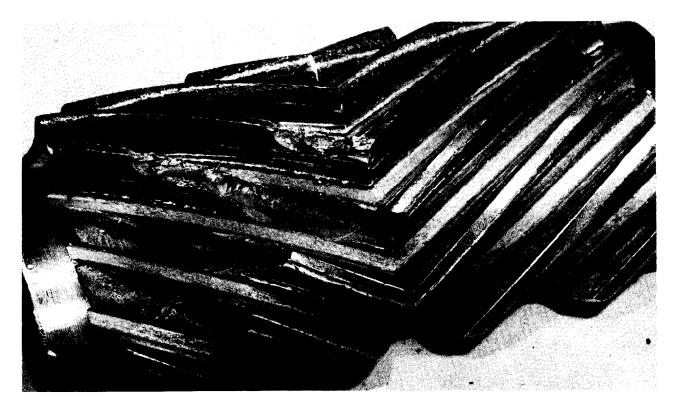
Pinion tooth pitting and breakage from torque overload applied outside apex.
